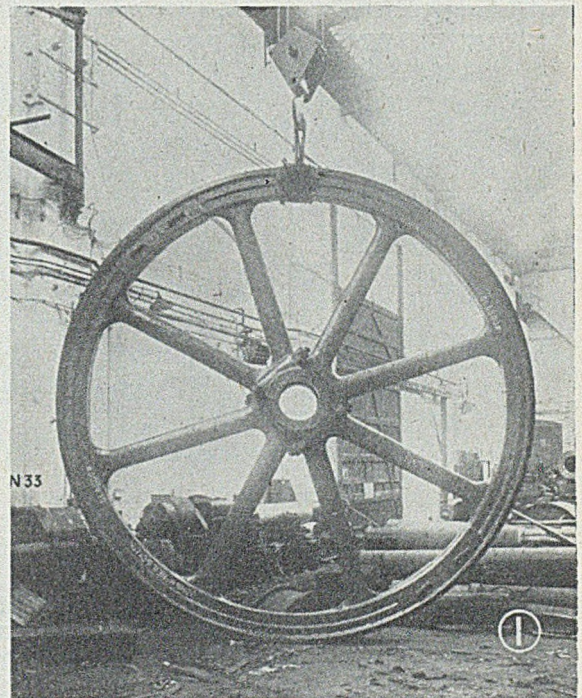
Two Finished Castings assembled to form the Flywheel, 20 ft. dia., weighing nearly 20 tons.
